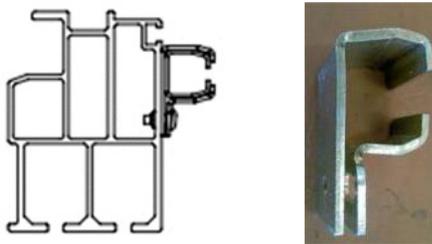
Wall mounting brackets and a wider joint bracket over the track joint.
